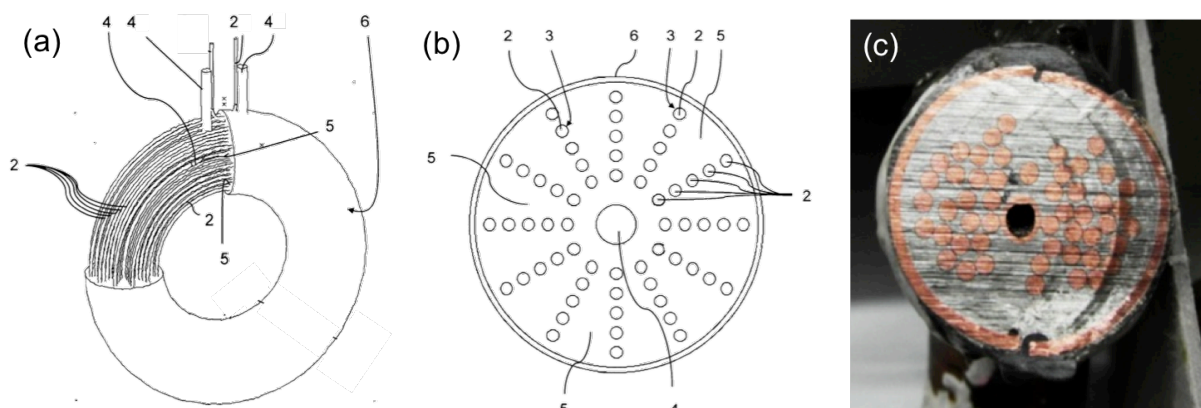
Sketch (a) side view and (b) cross section of the electromagnetic coil prepared as described above. Single electrical wires 2, insulating layer 3, cooling channel 4, LMTM matrix 5 and external coil enclosures 6 are displayed. Photograph of the cross section (c).
